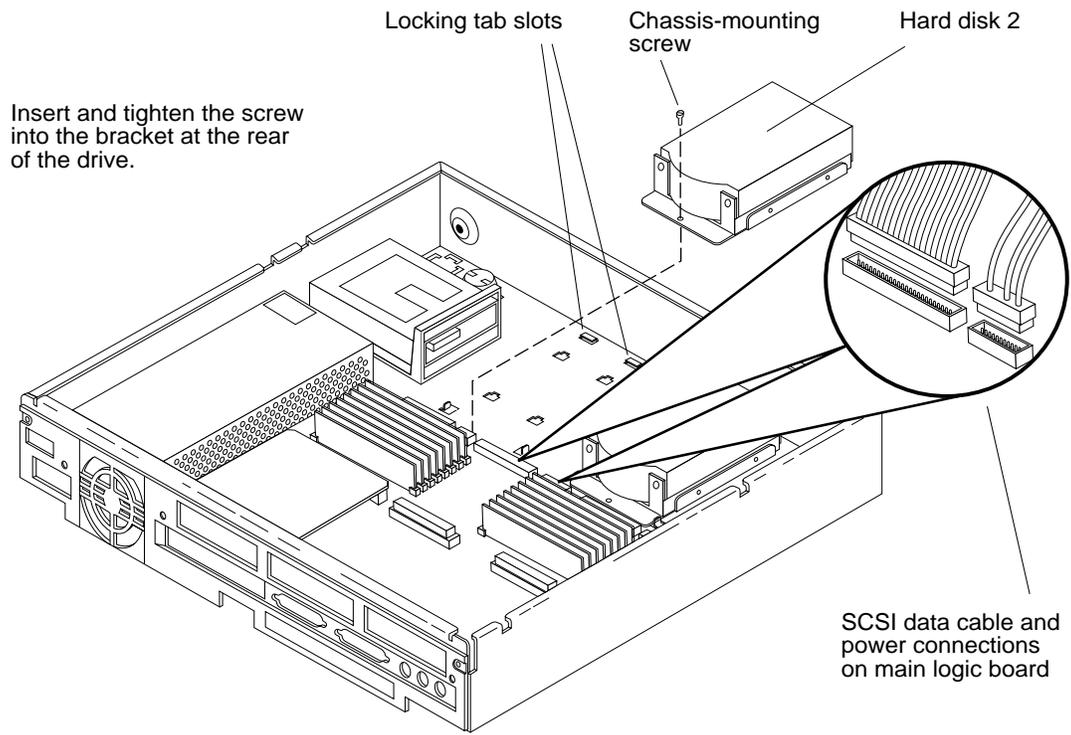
Removing and Replacing the Hard Disk Drive With the Metal Bracket
